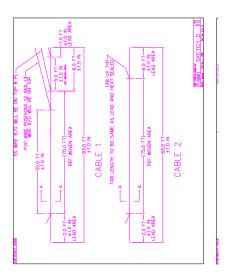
Technical drawing of custom cable from Woven Electronics. $\,$
